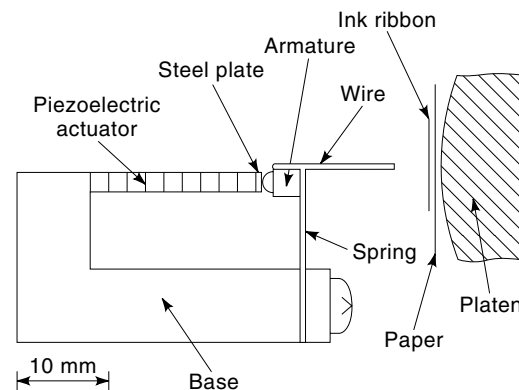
Dot-matrix printer head using a flight actuator mechanism.
